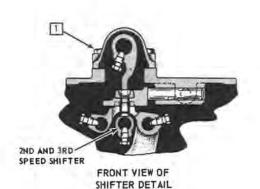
Tightening Shift Rail Poppet Ball Cover Capscrews
